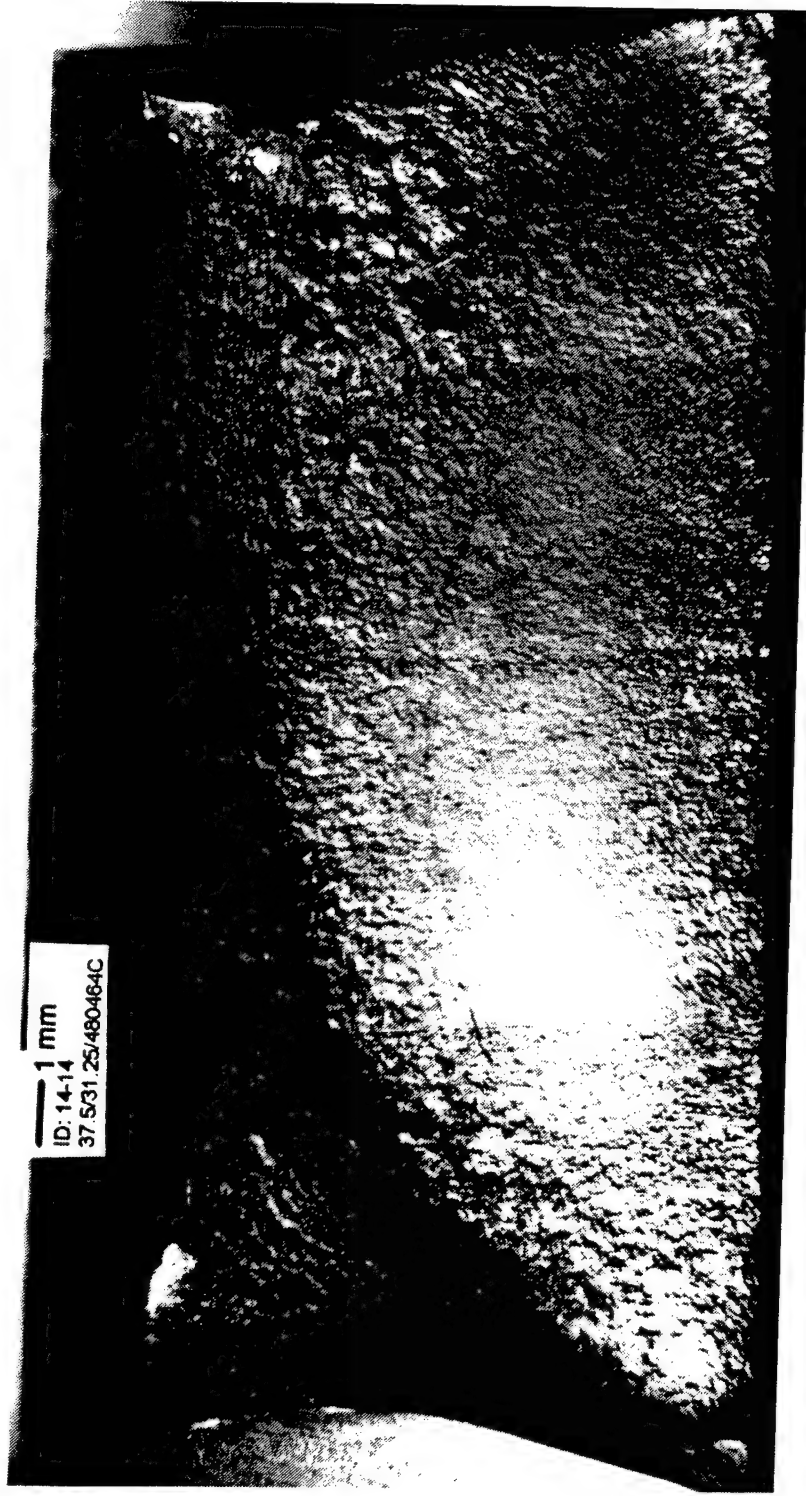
Fatigue fracture surface of the HSLA-80 but weld sample subjected to constant amplitude loading:
